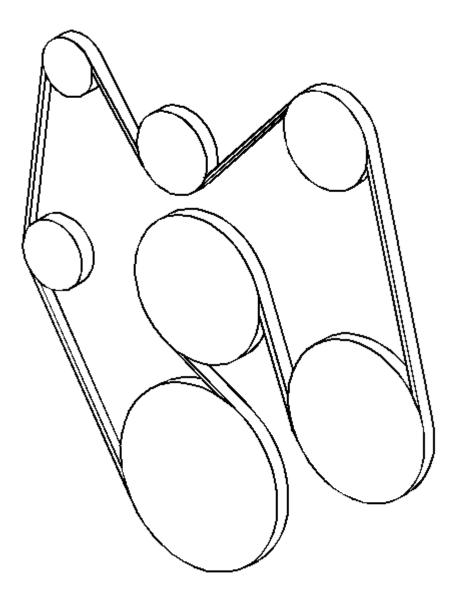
View Of Drive Belt Routing (W/O Air Conditioning) Courtesy of GENERAL MOTORS CORP.
